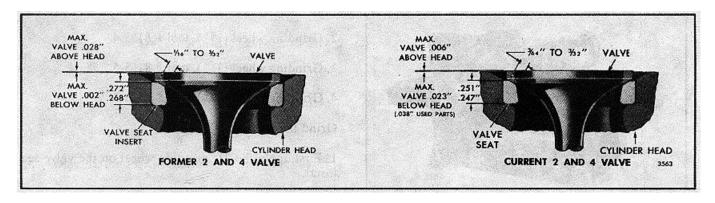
Relationship Between New Exhaust Valve, Insert and Cylinder Head (Both Exhaust Valve Seats Inserts Shown)
